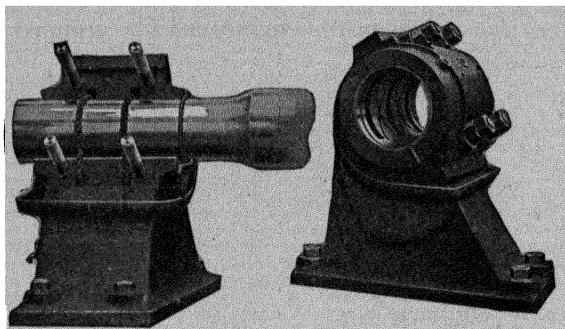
Out-Board Bearing of Simpler Construction than Main Bearing
